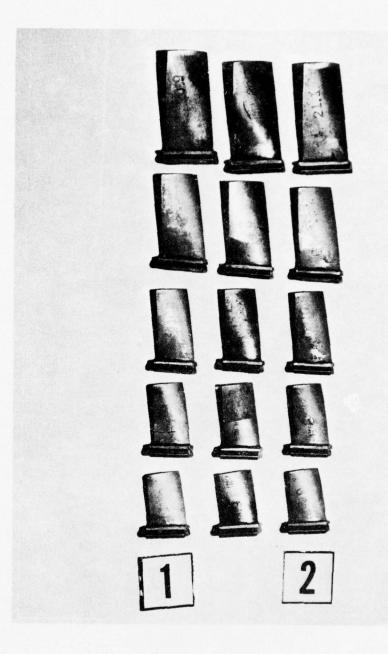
Pressure side of compressor rotor blades after 5.6 hours' sand exposure with separator installed.
